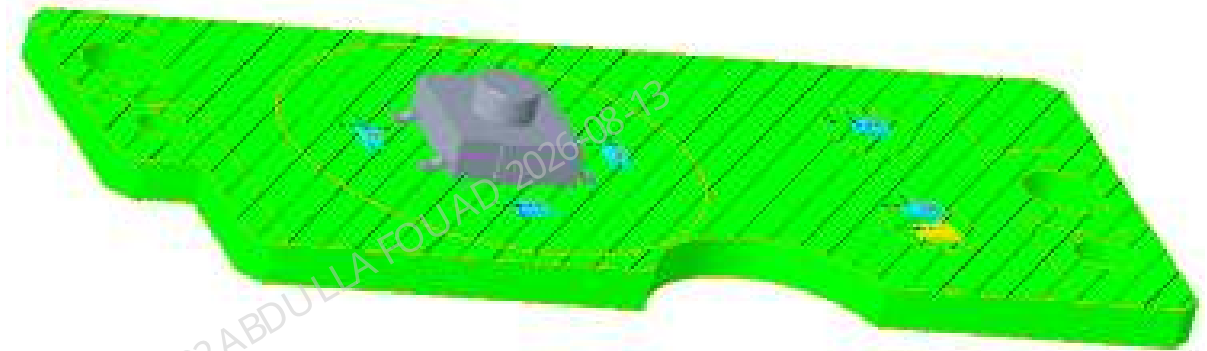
Position of Switch Key Board PCBA-T on the Overall Unit
